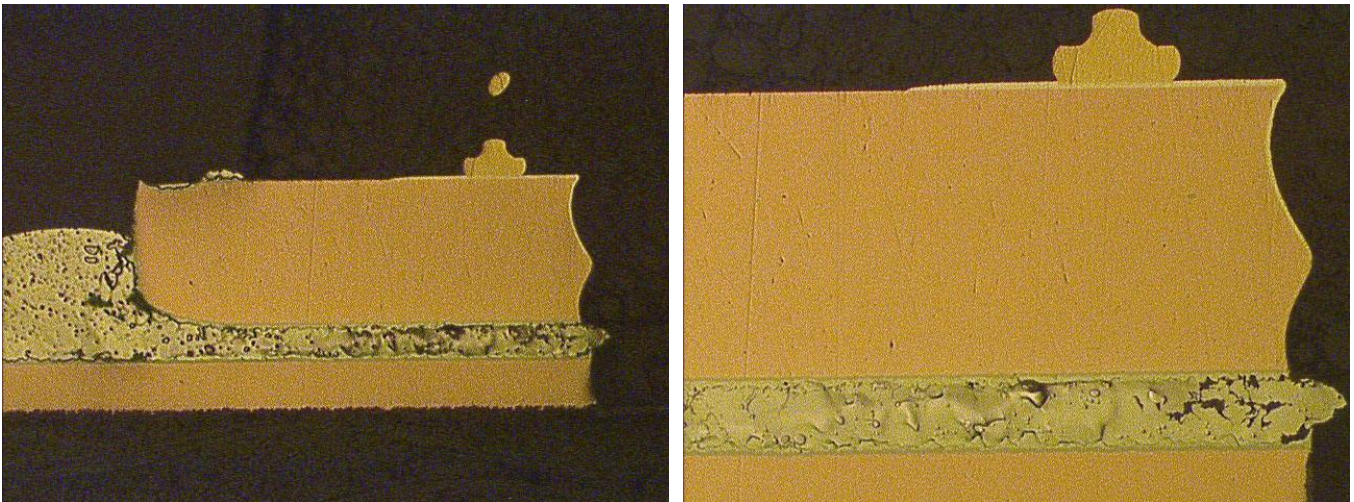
QFN-20 Solder Joints, Board 42, Component U54, SAC305/Sn, DNF
